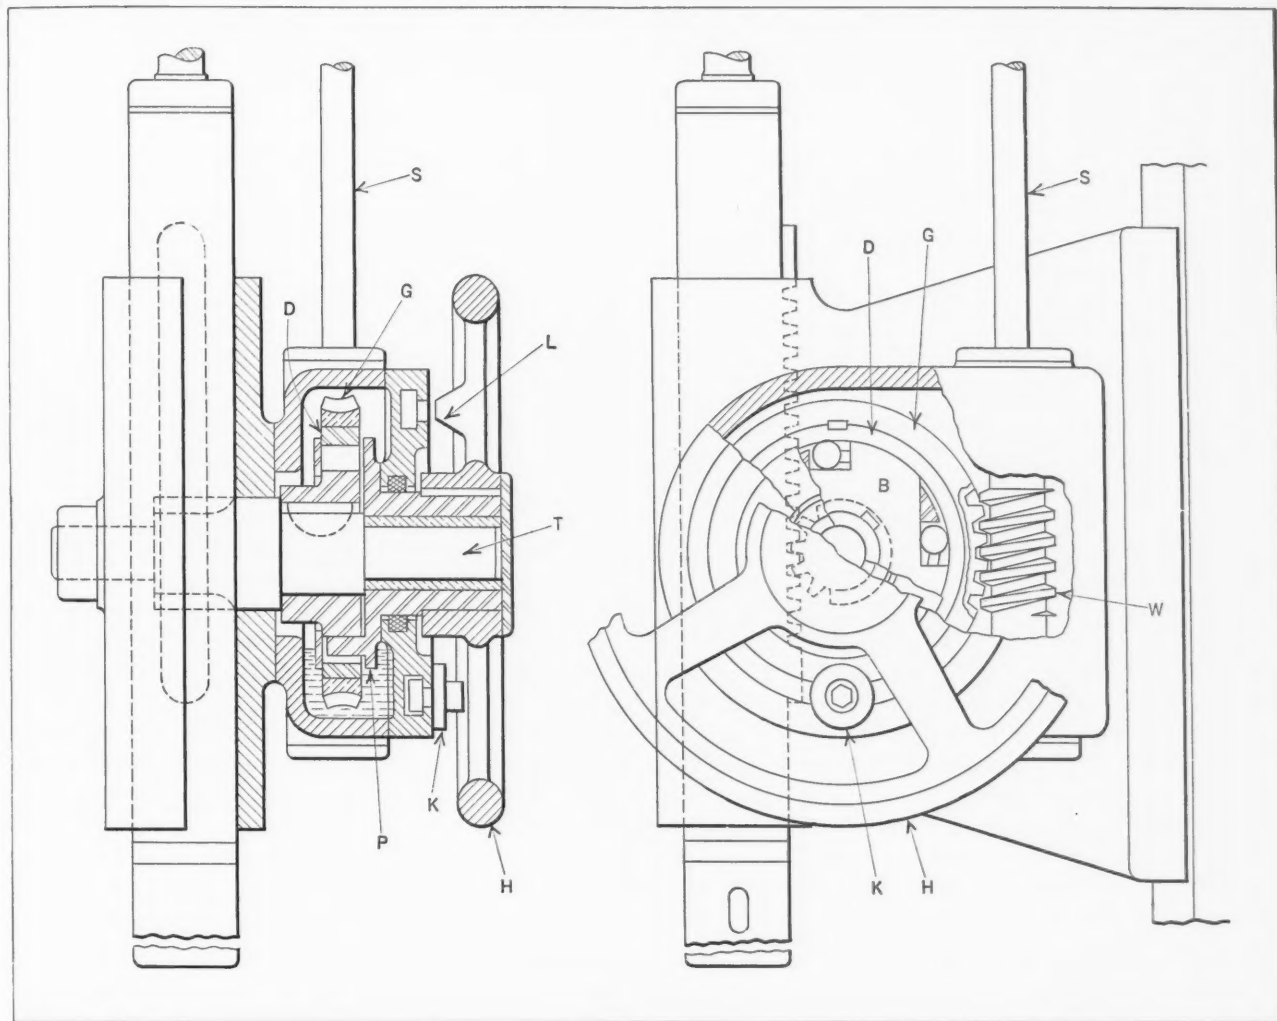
Roller Clutch Incorporated in Drill Spindle Feed. Operator Controls Power and Hand Feed with a Single Handwheel
